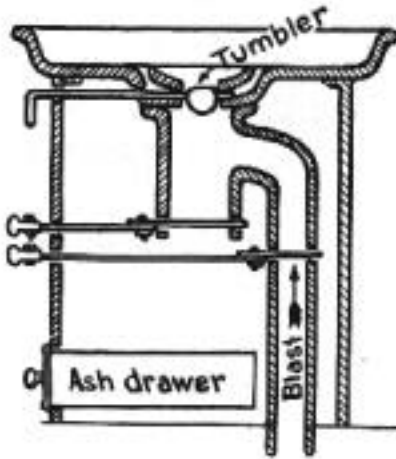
SECTIONAL VIEW OF THE FORGE SHOWN IN FIG. 2.
